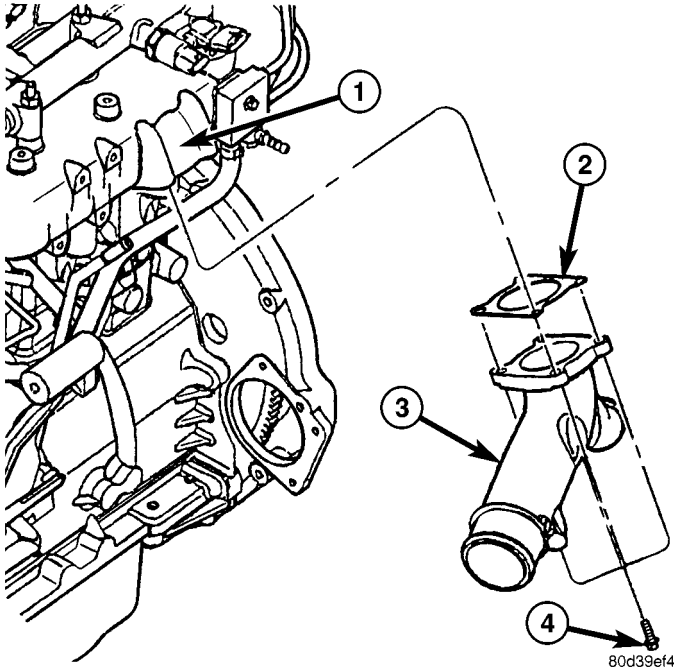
INTAKE MANIFOLD AIR INLET TUBE
